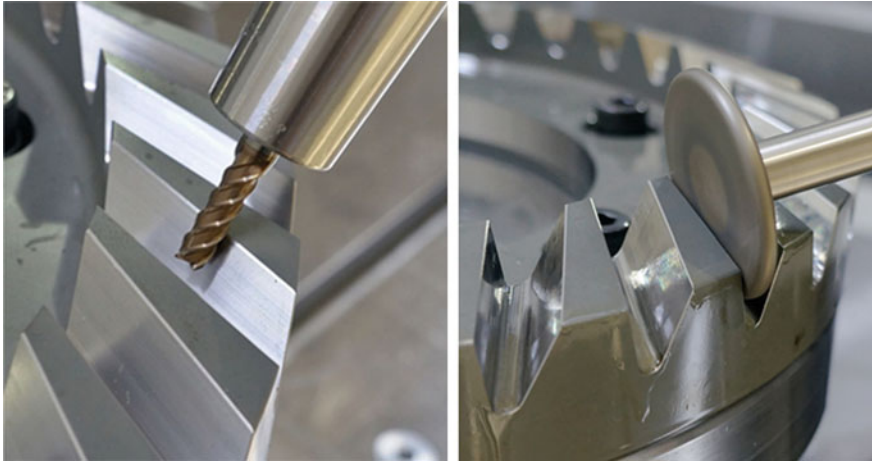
Rough-cutting and finish-grinding of IPB wheel teeth
